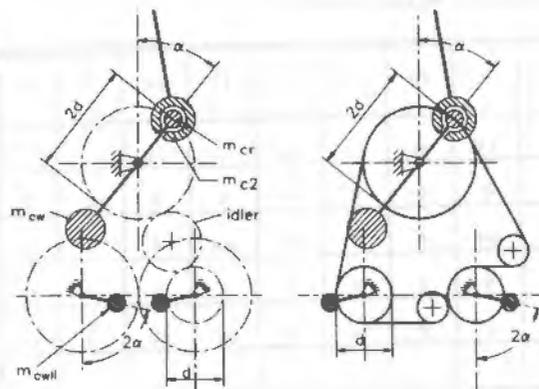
2ω Gear and Chain Drives of Four Cylinder Engine Balancing Shafts
